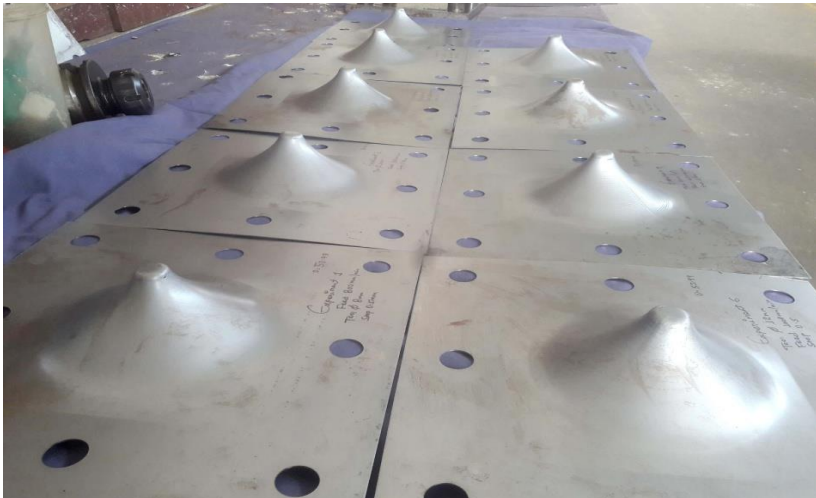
Parts formed based of L9 (3^3) design of experiment.
